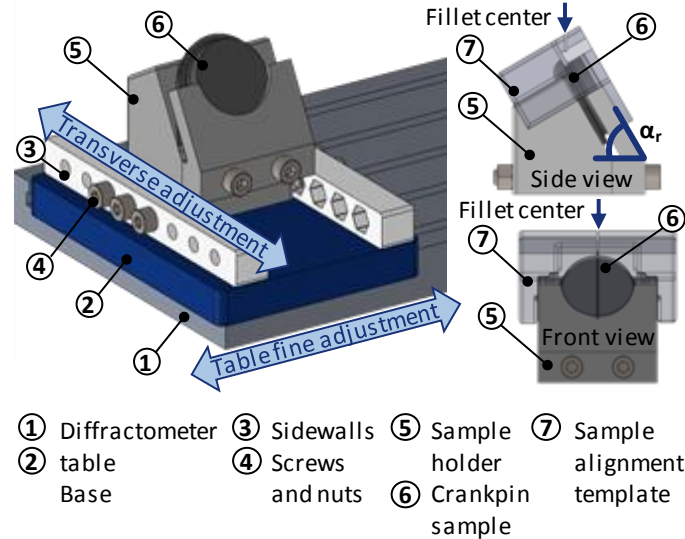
Templates designed to position the crankpin specimen in the diffractometer.
